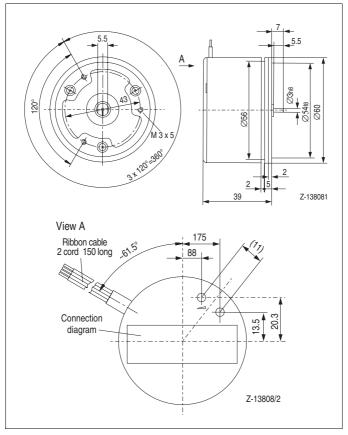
Dimensional drawings (all dimensions in mm)
